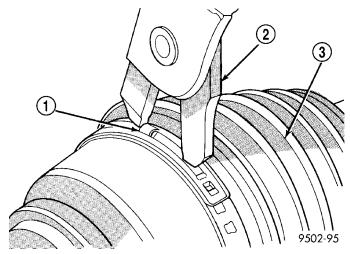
Clamping Tool Installed on Sealing Boot Clamp
